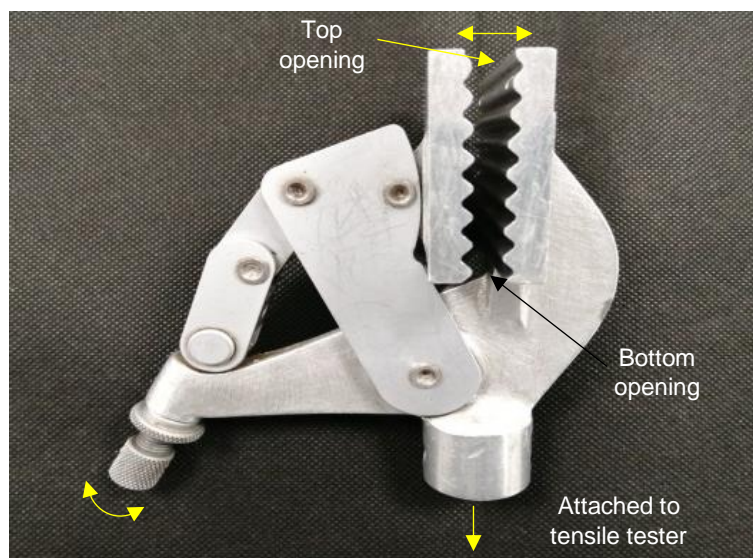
Photograph of the metal grip former used in fabricating TBS test specimen.
